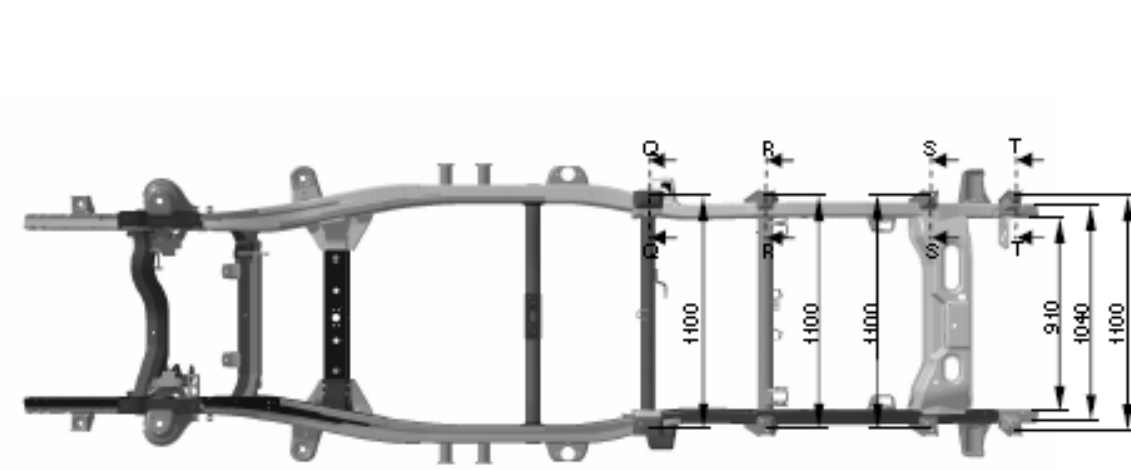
Plan view of ladder frame AMAROK SC
